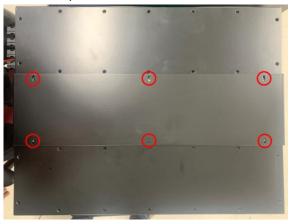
REMOVING THE FEED-H CENTER COVER
